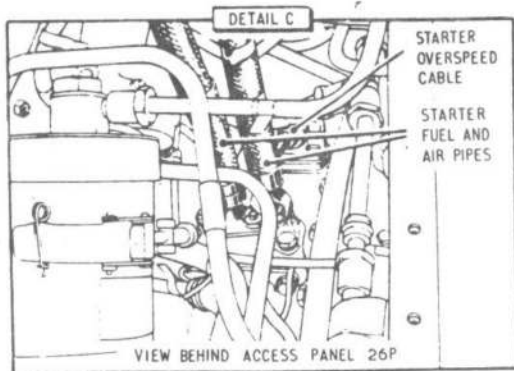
No.1. E.C.U.—REMOVAL AND ASSEMBLY (1)
